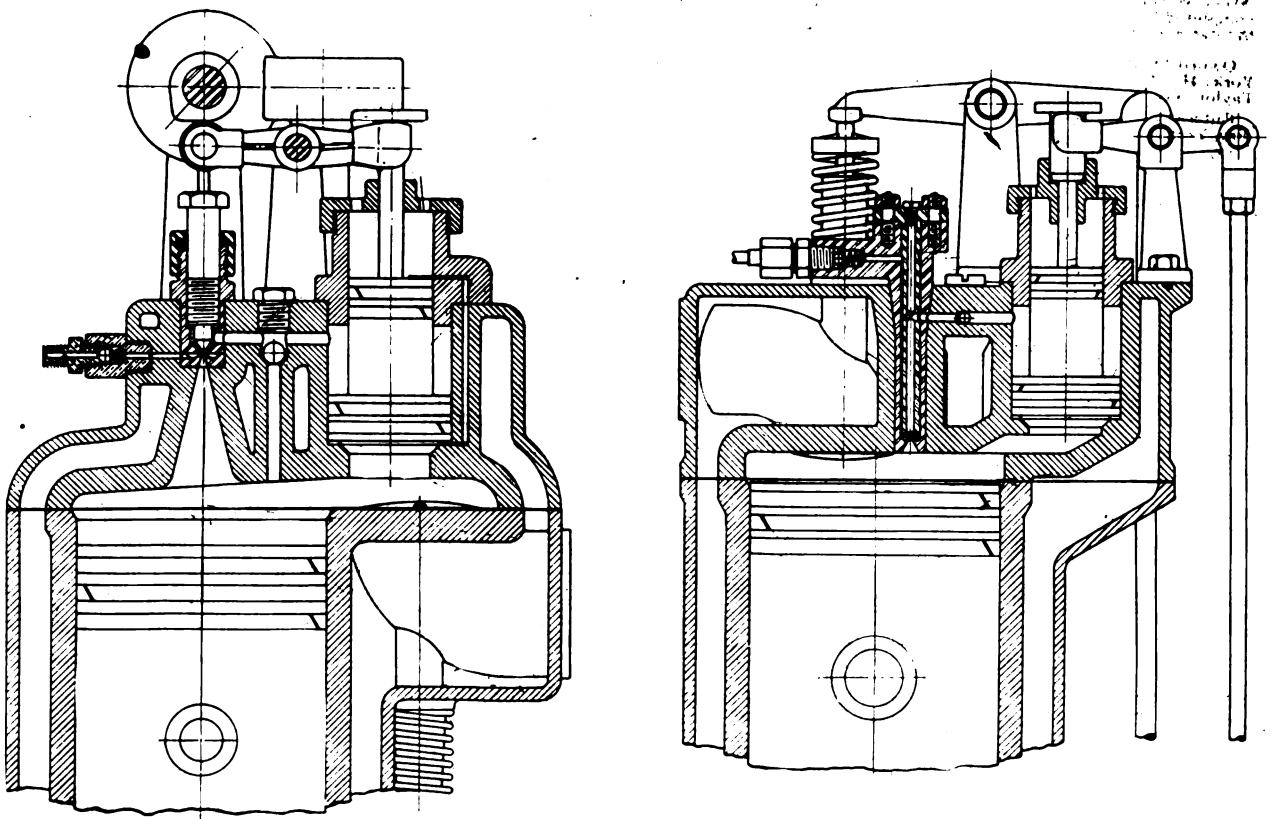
shows a possible application of the injector to a four-cycle L-head motor, and Fig. 4 shows it in connection with a valve-in-head type.
